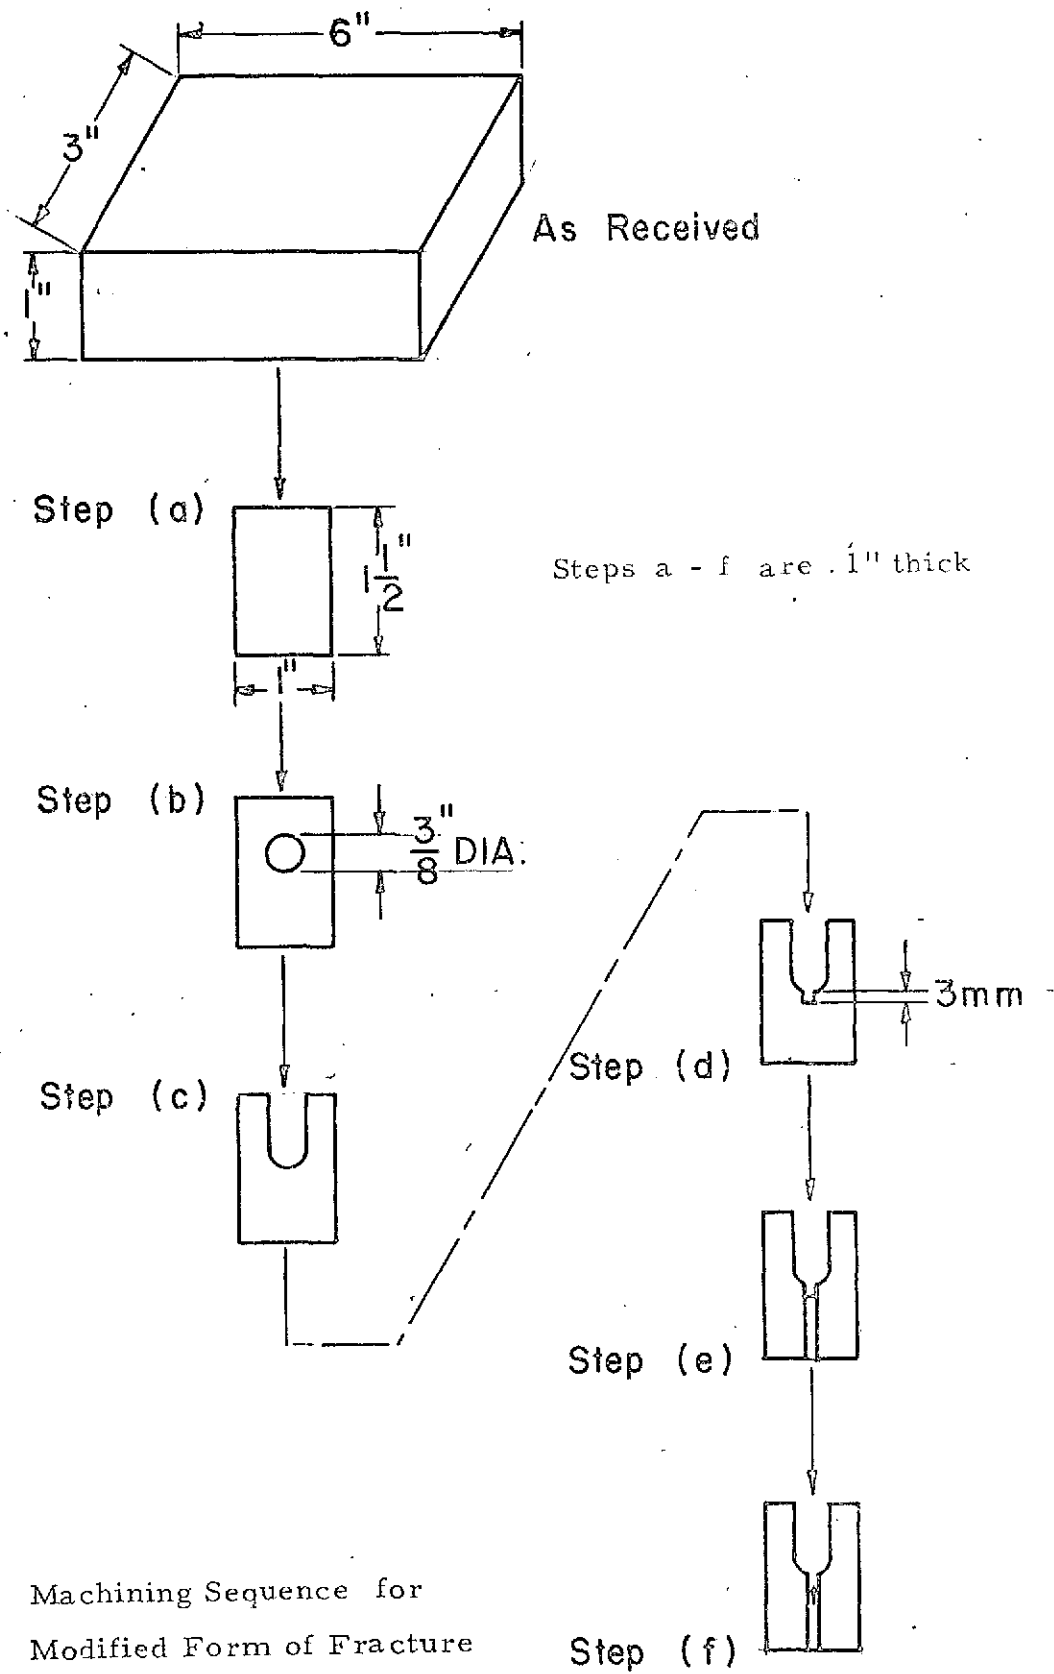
Machining Sequence for Modified Form of Fracture Specimen
